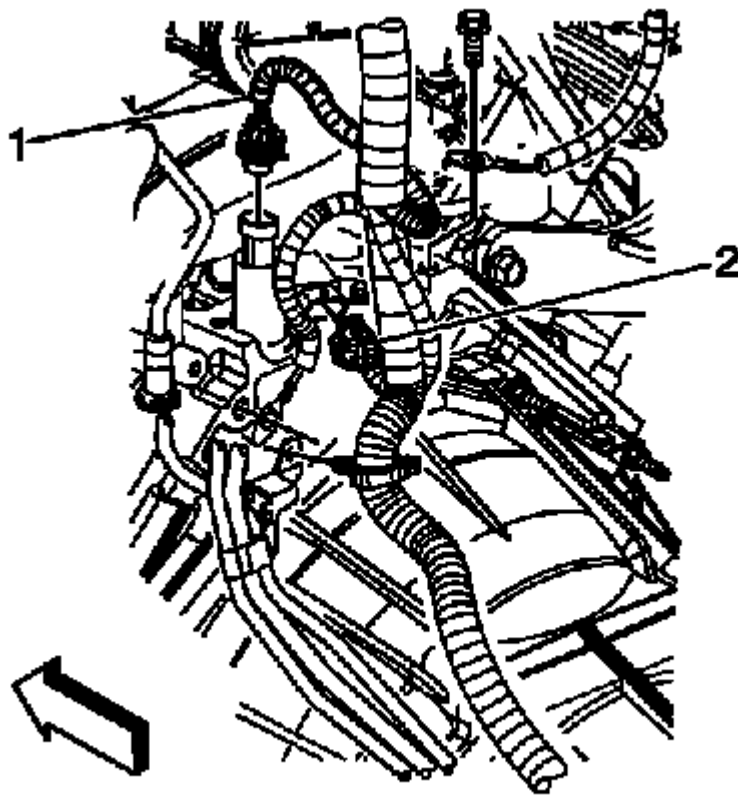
View Of Oil Pressure Sensor & CMP Sensor Connectors
